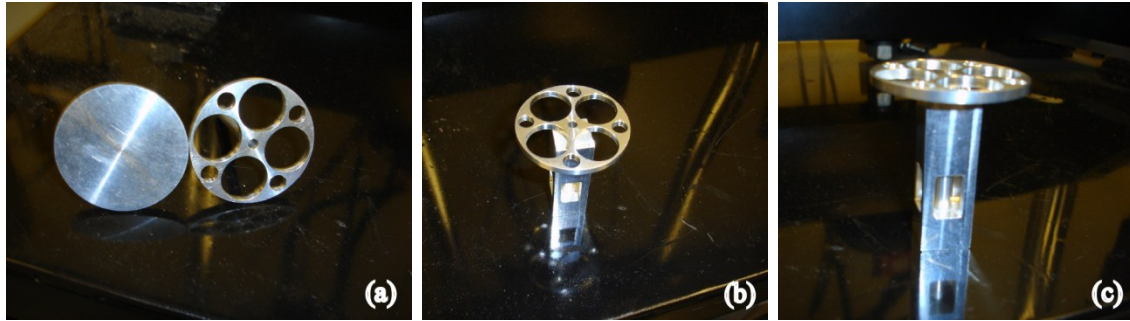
Aluminum fixtures. a) Weight-minimized loading column. b) and c) Loading column inserted into fixture containing the confining chamber.
